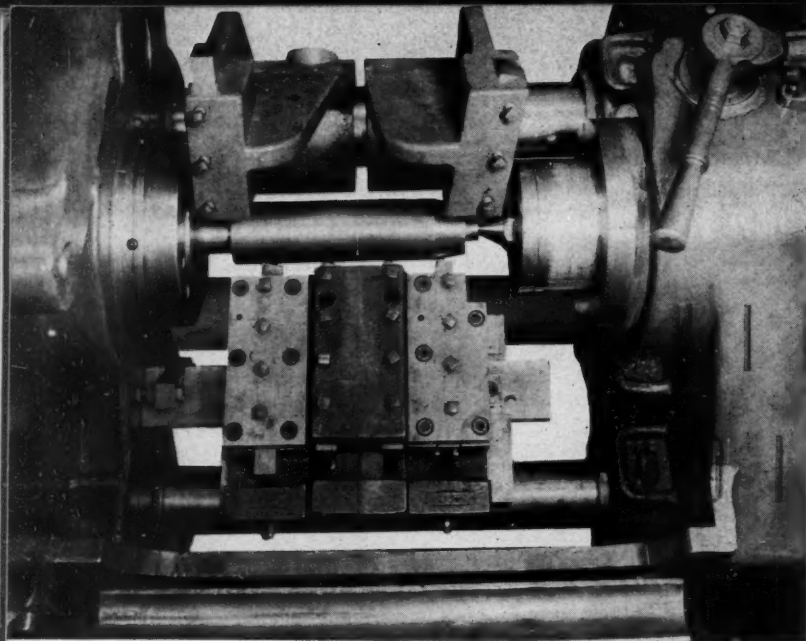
Plan view shows turning and forming tool holders. Pouring holes for alloy used to position bushings may be seen on the right or tailstock end
